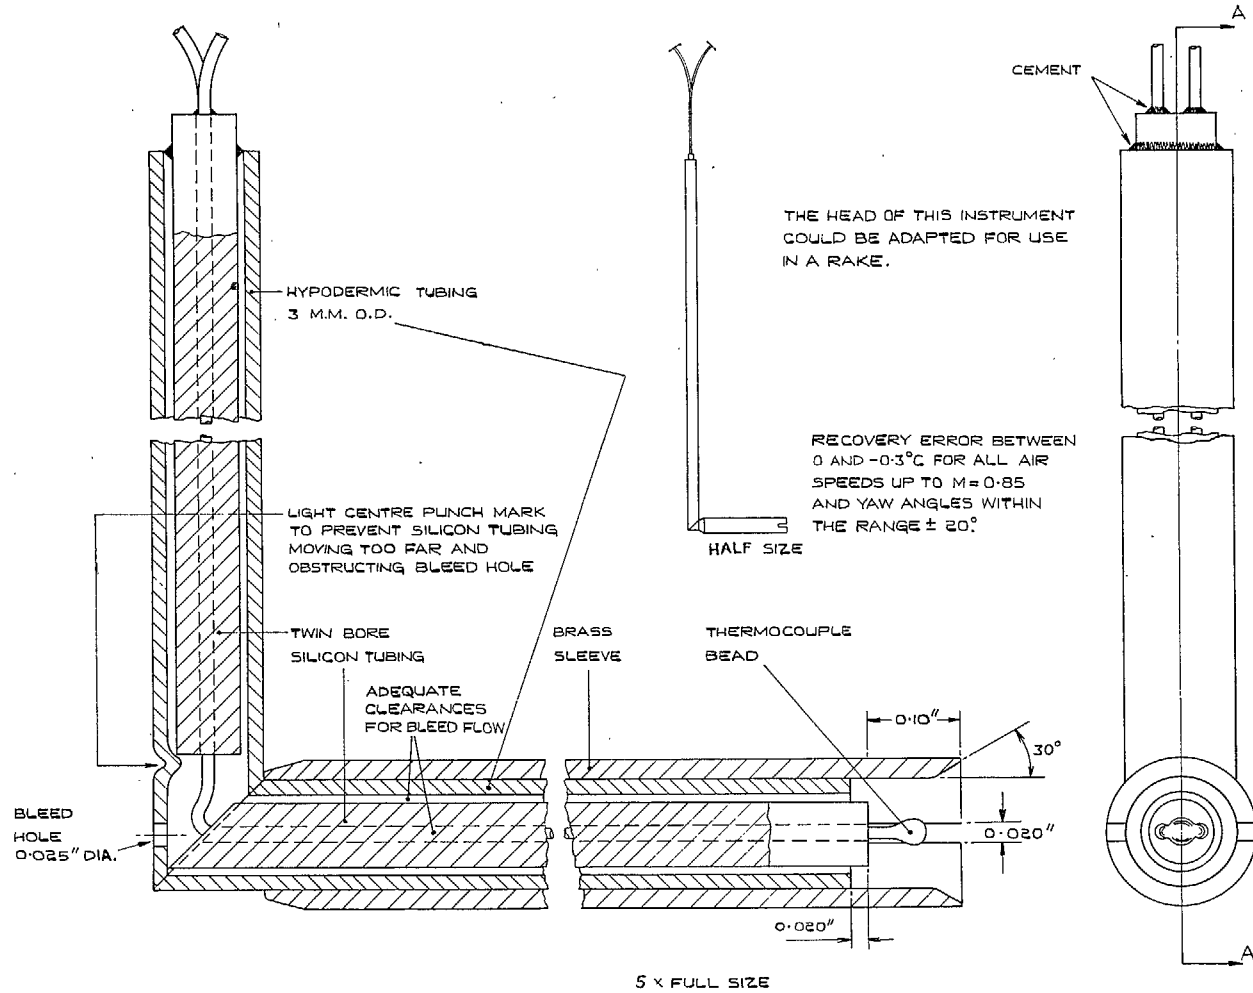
'Slit pitot' type thermocouple shield. (Ref. 23—modified version.)
